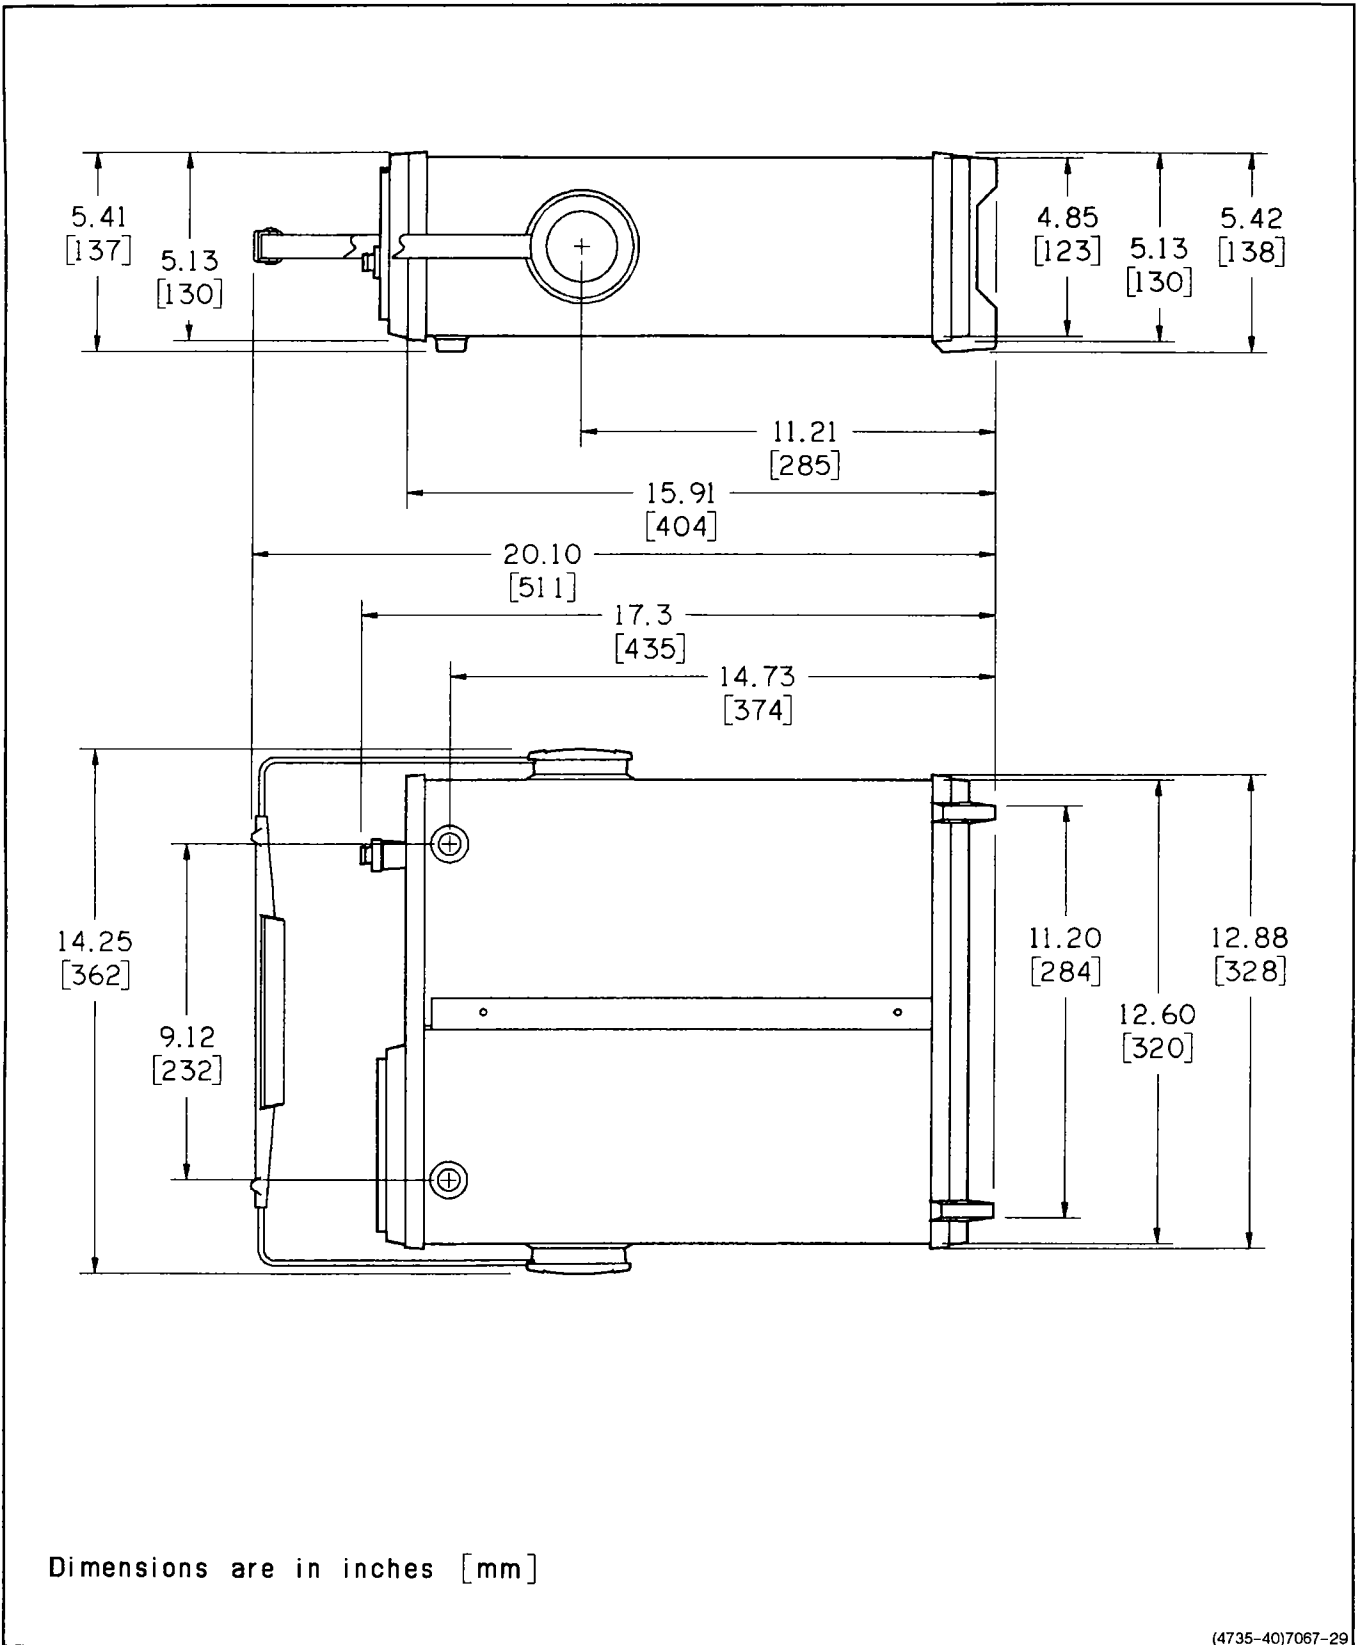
Physical dimensions of the 2232 Oscilloscope.
